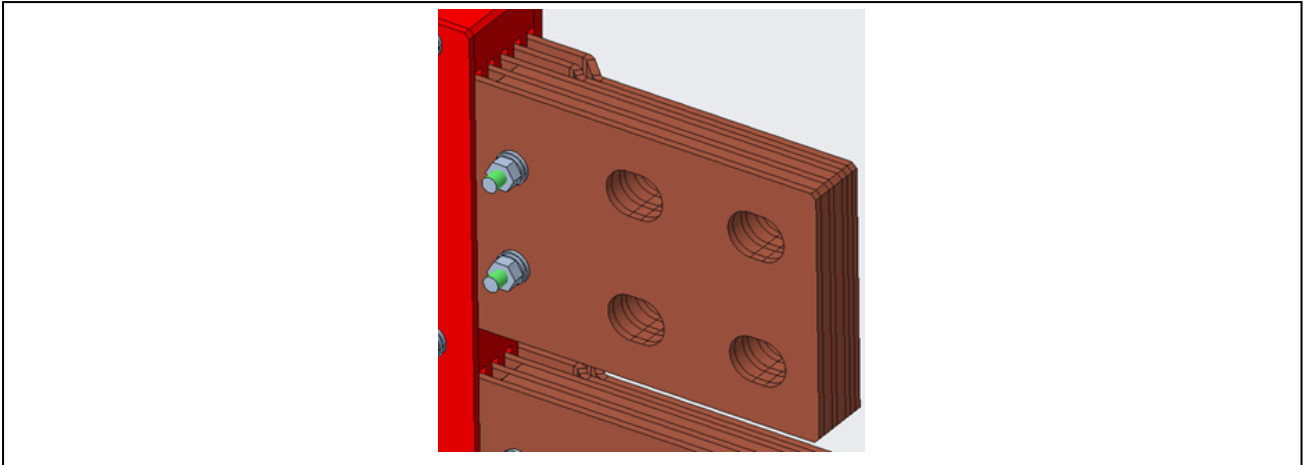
Front-Right Detail of Two Core 2x Units Assembled for Installation to the Static Transfer Switch
